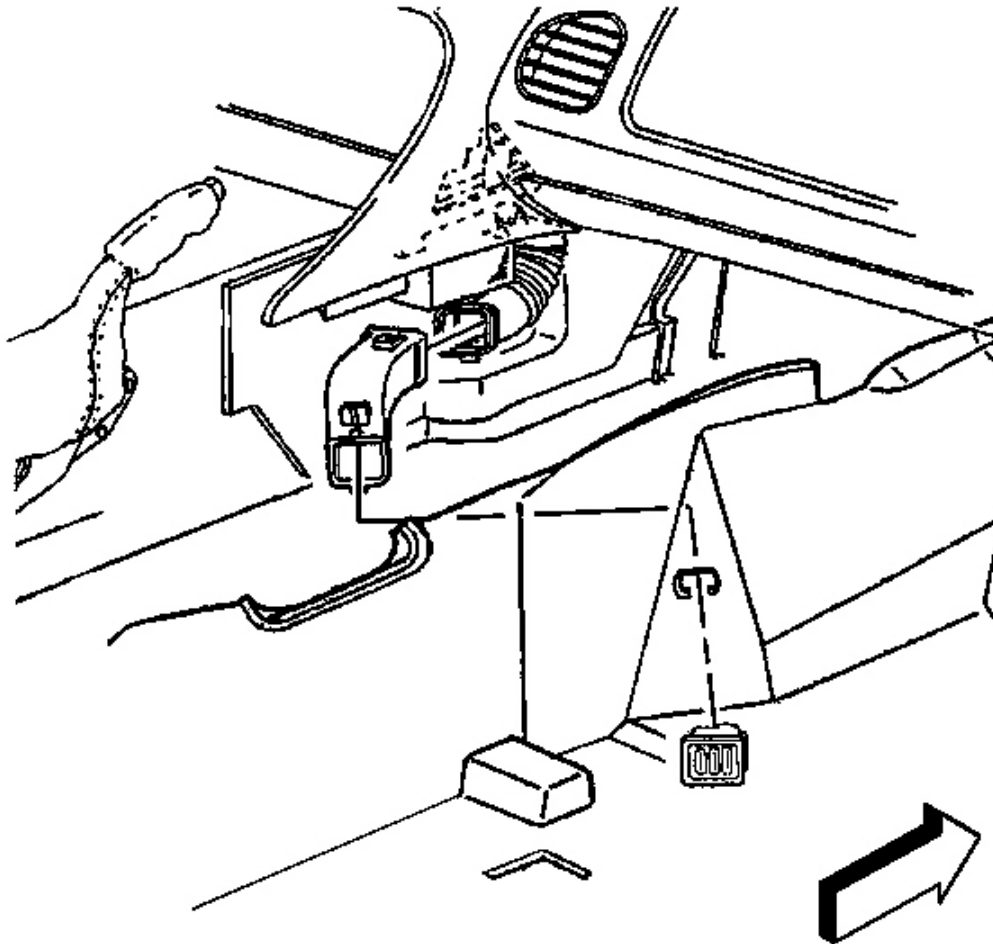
RH Side I/P Accessory Trim Plate & I/P Upper Trim Pad
